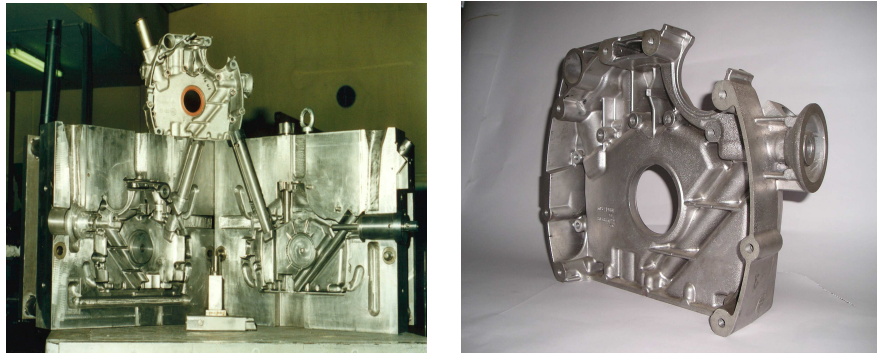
Steel mould used in a gravity die-casting process and the corresponding aluminium casting part.
